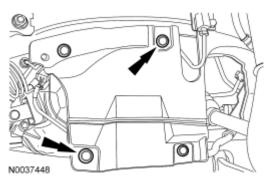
Locating LH Splash Shield Pin-Type Retainers Courtesy of FORD MOTOR CO.
